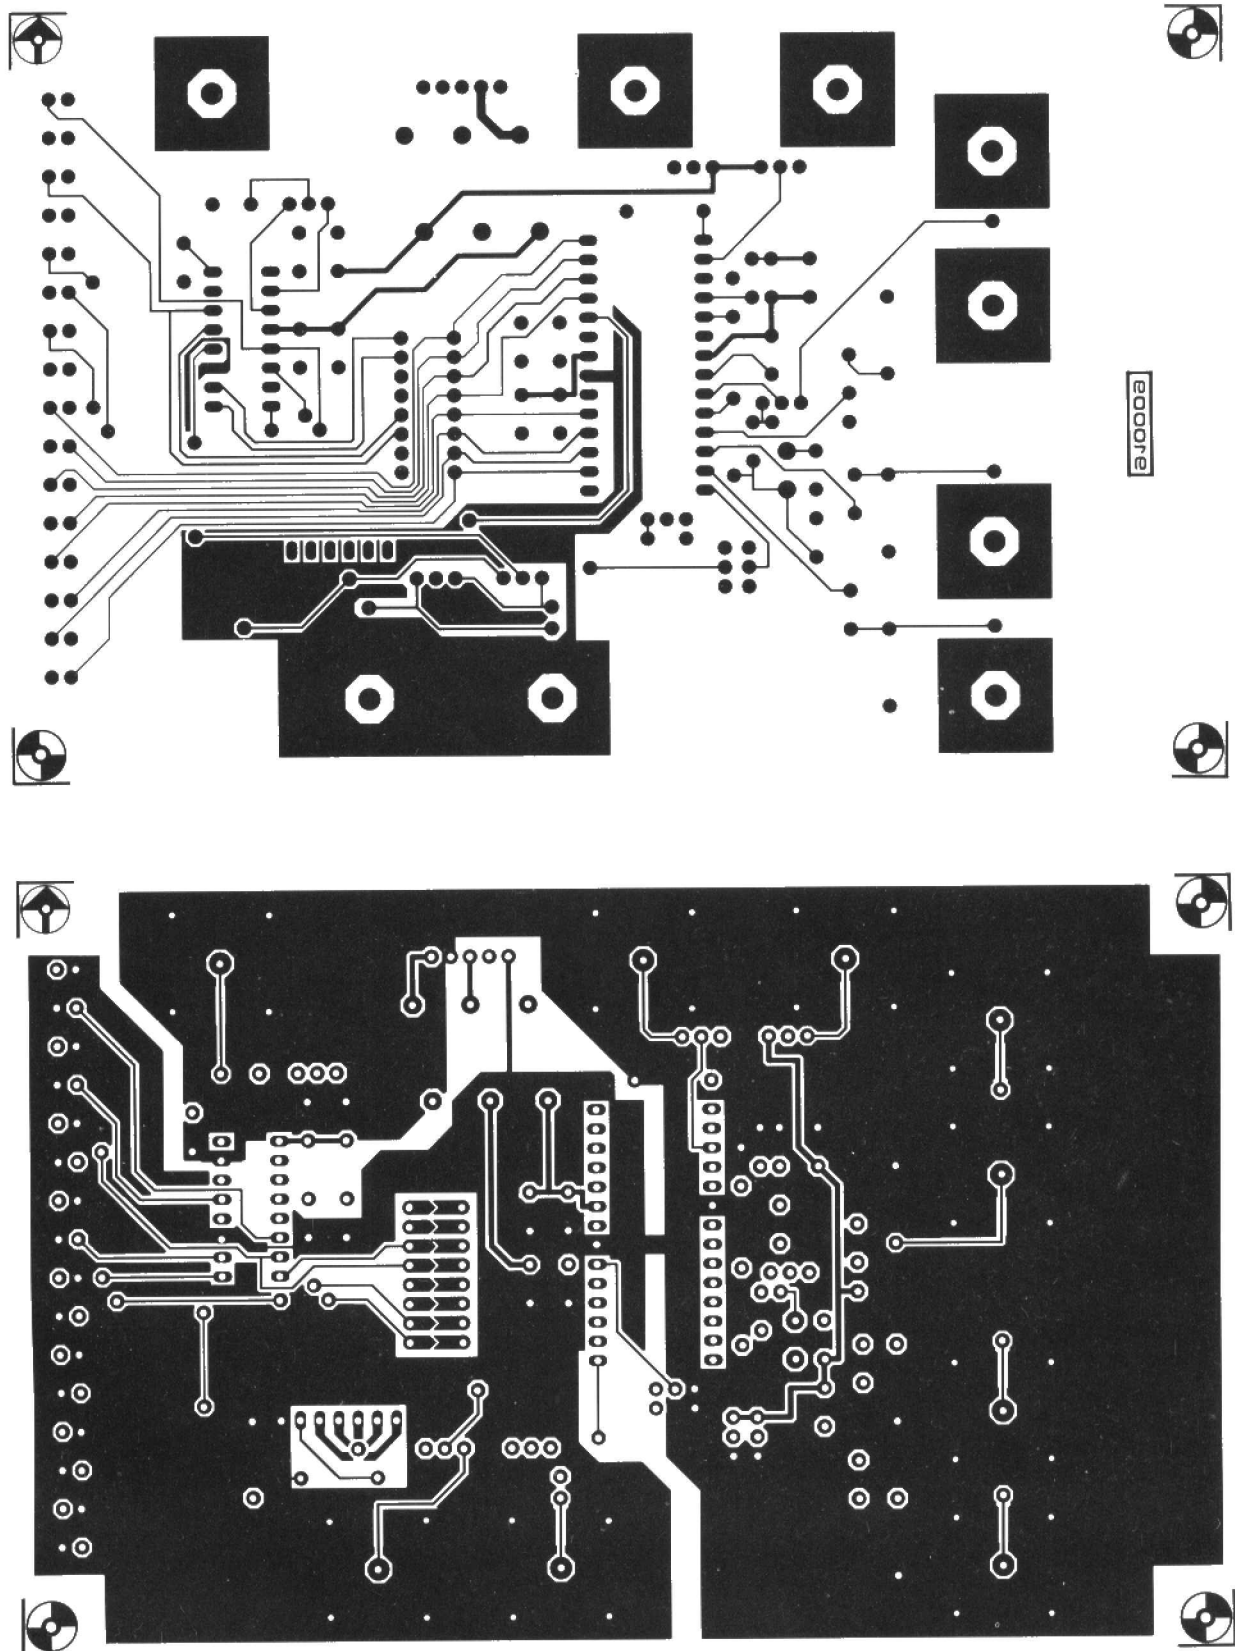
Solder side (above) and component side (below) of the PCB for the video ADC/DAC card.
